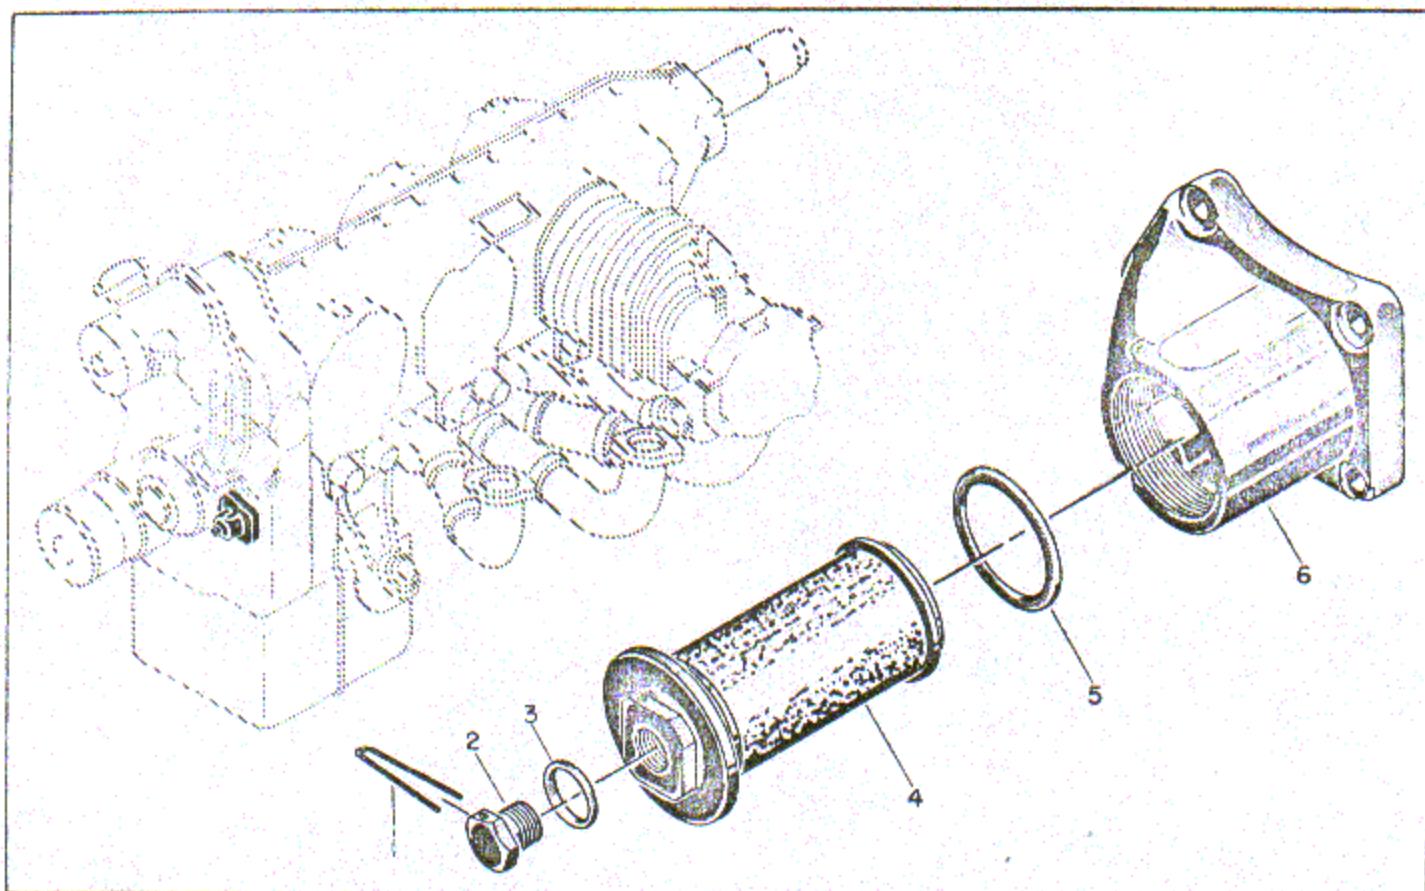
Exploded Parts View of O-470-7 Pressure Oil Screen and Housing Assembly
